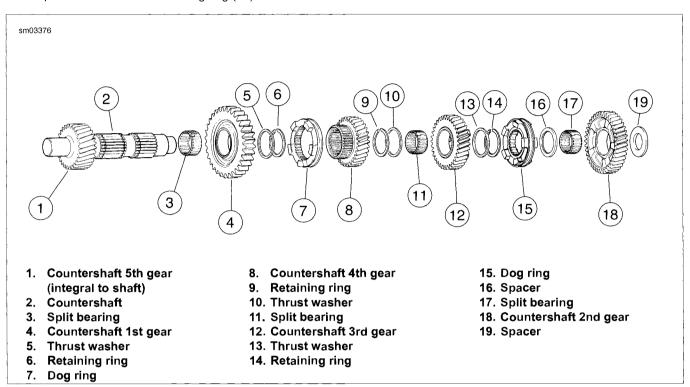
Transmission Countershaft Assembly Once Removed from Left Crankcase/Disassembly
